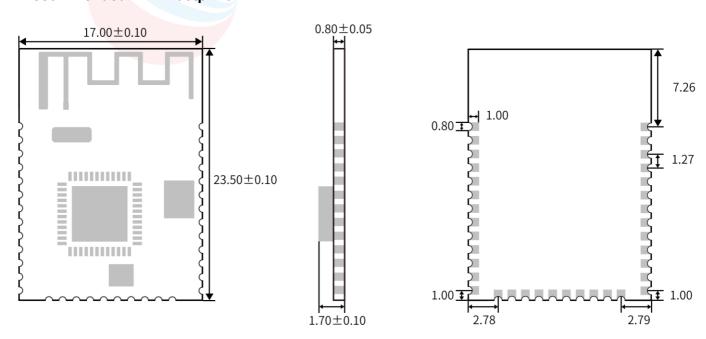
Recommended PCB Footprint of RF-BM-4077B1L (mm)
